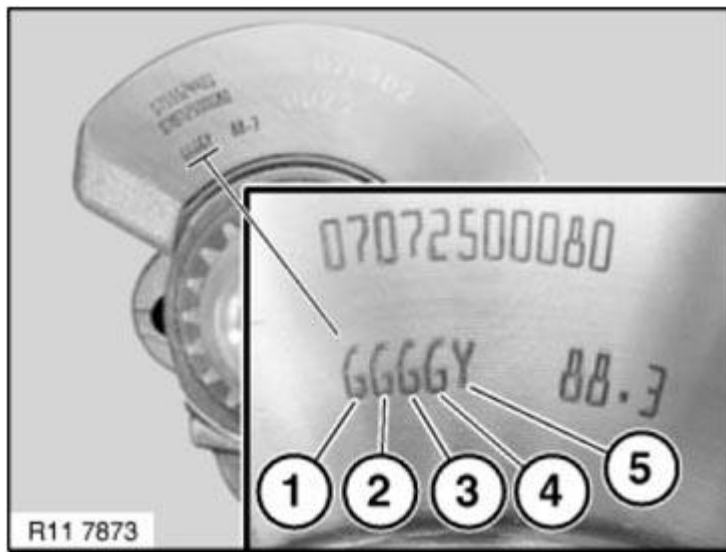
Identifying Color Assignment On Crankshaft 1 To 5
